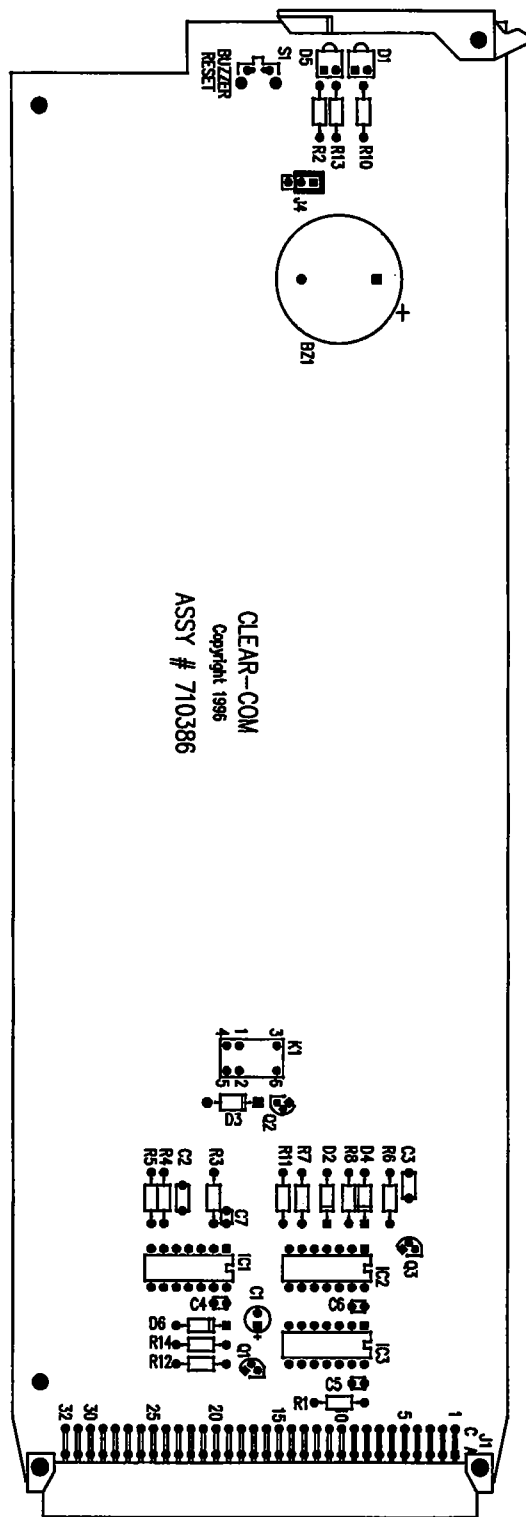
ALARM PCB Assembly Drawing, Rev. A
